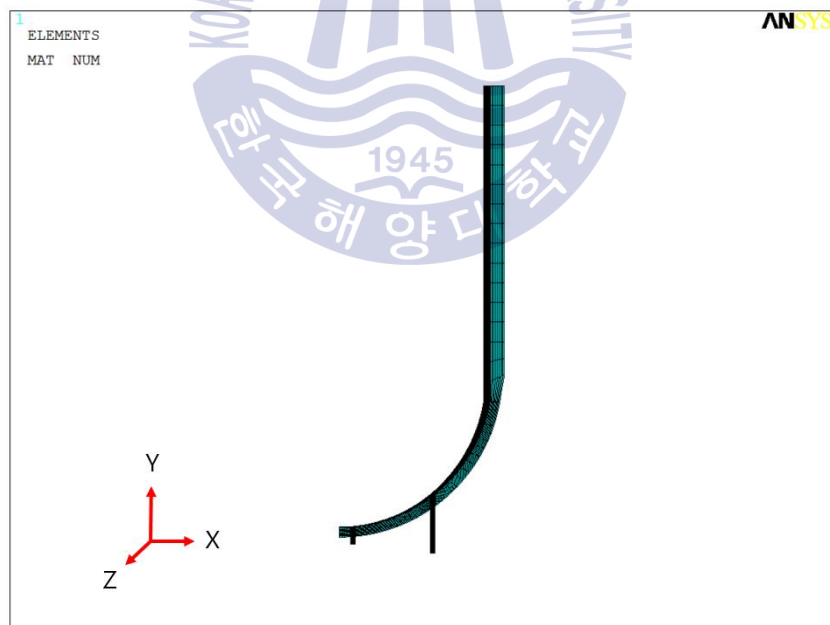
Drawing of ICI tube and weld region
